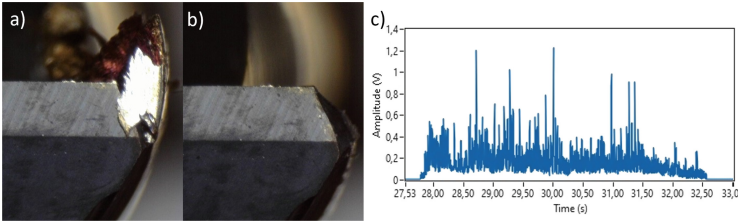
Cutting tool in one of the preliminary tests a) showing adhesion of workpiece material to cutting edge, b) wear of the tool tip and c) acoustic emission pattern.
